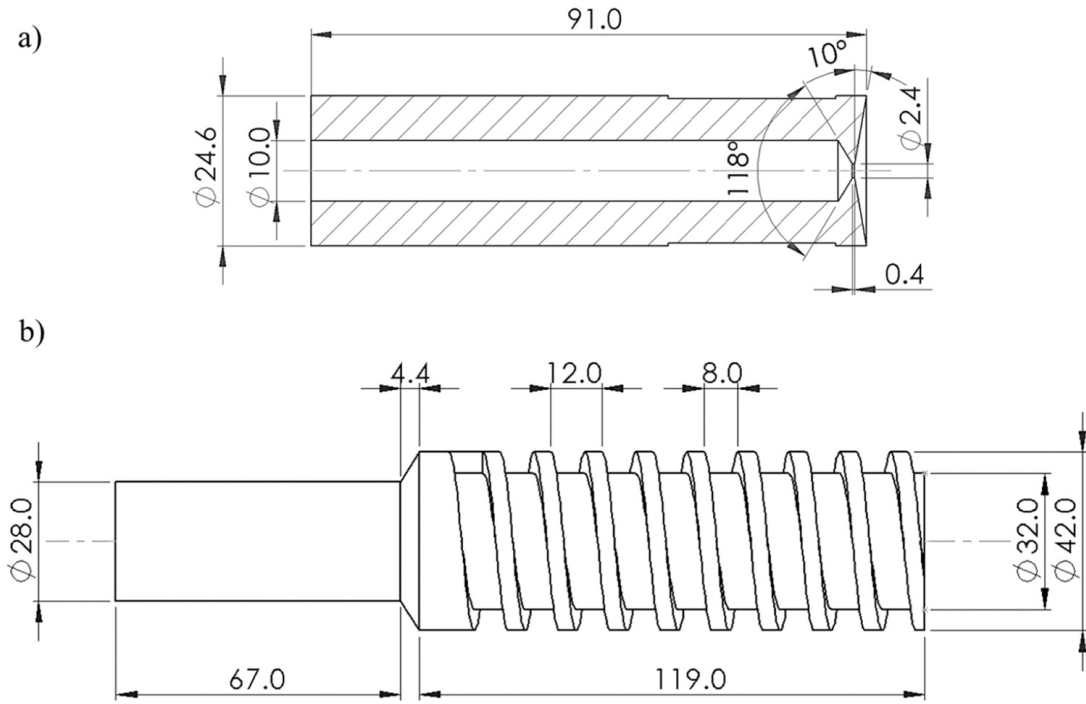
(a) Geometry dimensions of the rotating tool and (b) geometry dimensions of the redesigned cochlea.
